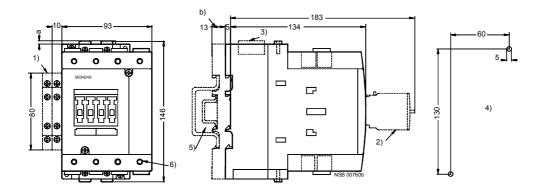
3RT13 4 with surge suppressor and auxiliary contact block
